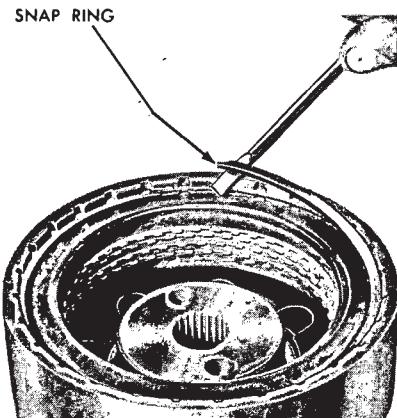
Removing or Installing Forward Clutch Pressure Plate Snap Ring
